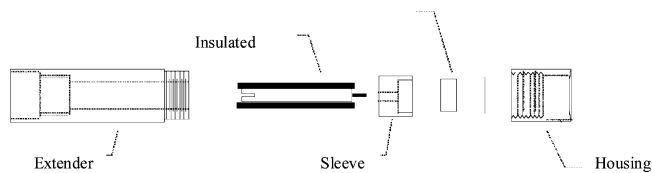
Cross-section through the electro-acoustic transducer parts separated for the sake of clarity.
